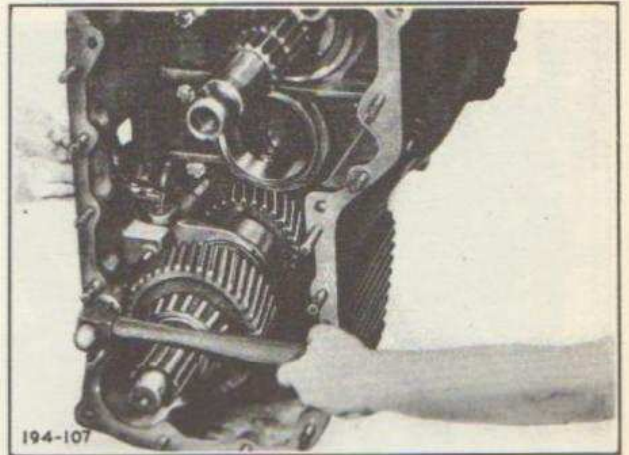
Installing Front Drive Declutch Shaft and Cotter Pin
